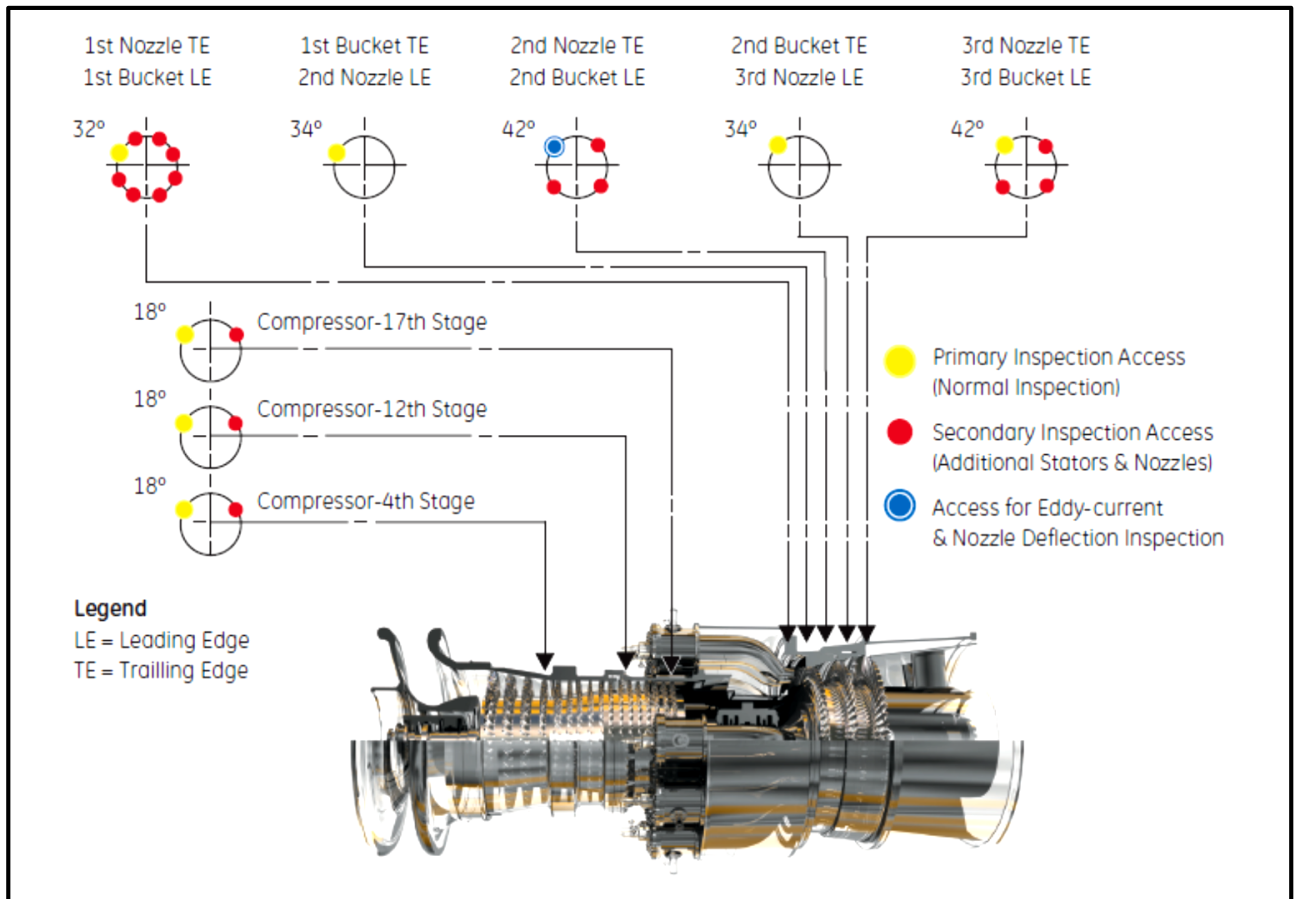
Gas turbine borescope inspection access locations [38].
